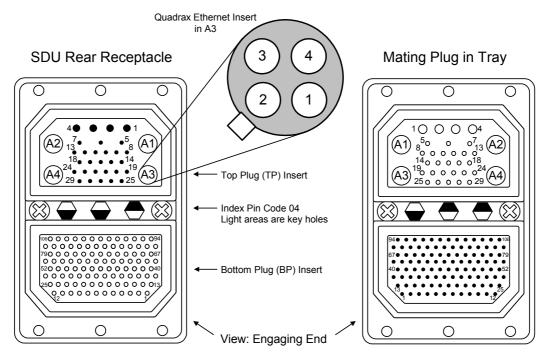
SDU Rear Receptacle and Mating Plug in Tray, Engaging End
